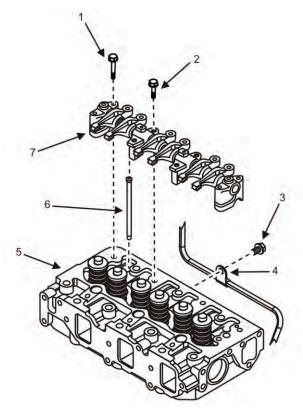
Rocker Arms and Push Rods — Removal Detail.
